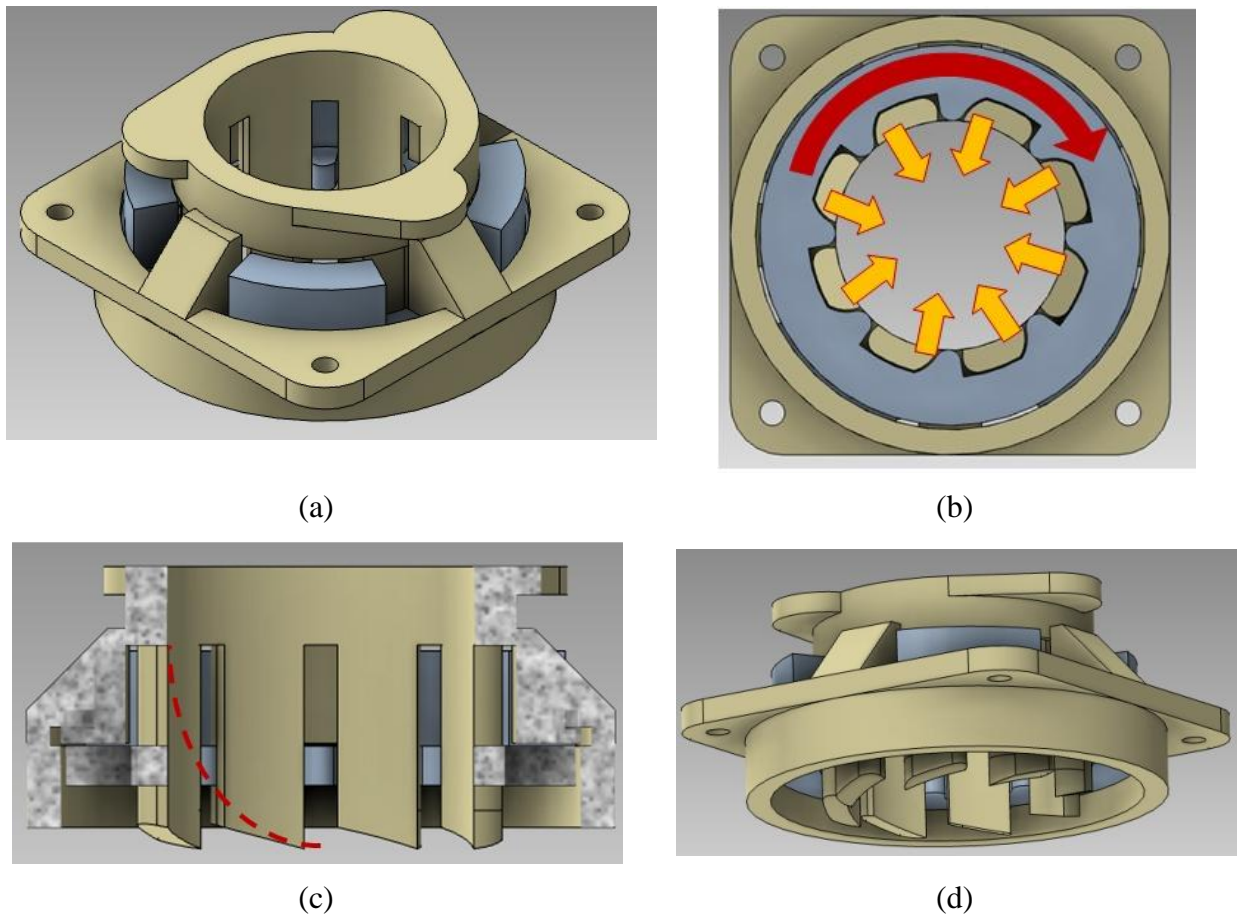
Multiple parting direction hair clearing socket design: (a) Top view, where the blue part presents the rotating ring that can either close the pins into the middle or allow them to return to their naturally open position, (b) Bottom view showing the ring rotating movement and the pins closing movement., (c) Sectional view showing the shape of the pins once the ring is "closed", (d) A side view showing the elongated profile of the pins that allows to part the hair
